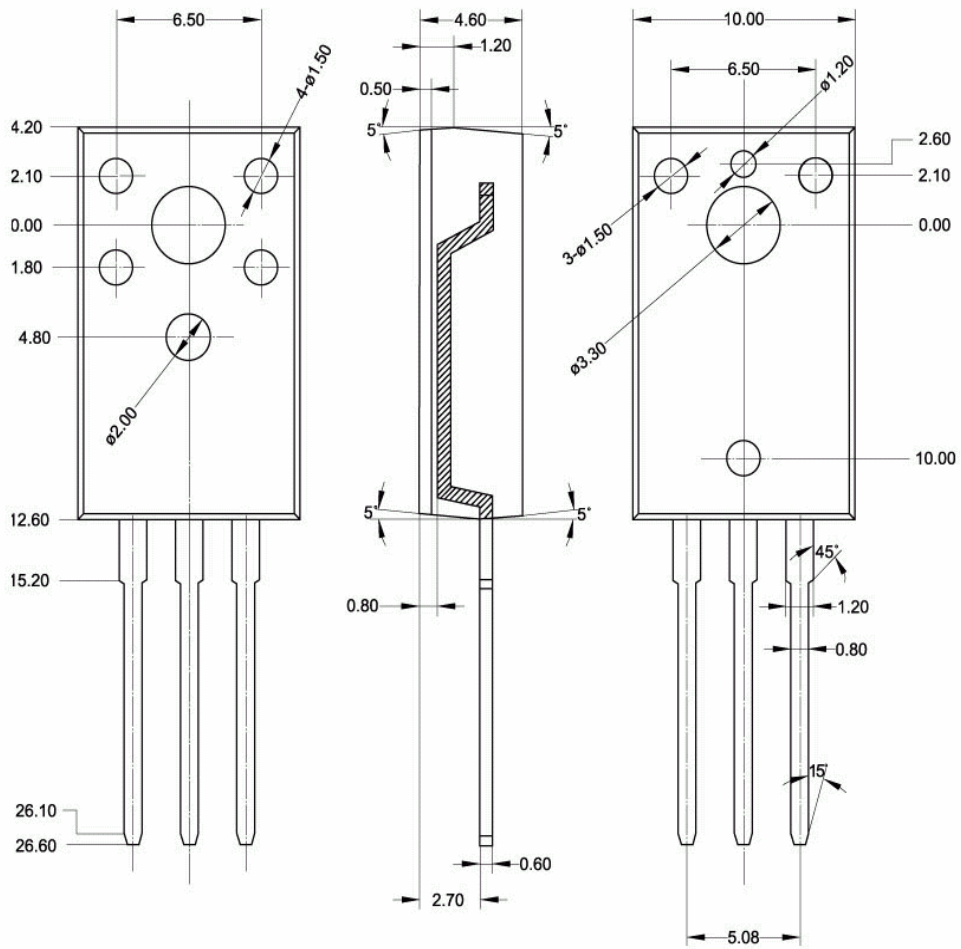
Outline dimensions (unindicated tolerance: ± 0.20 mm)
